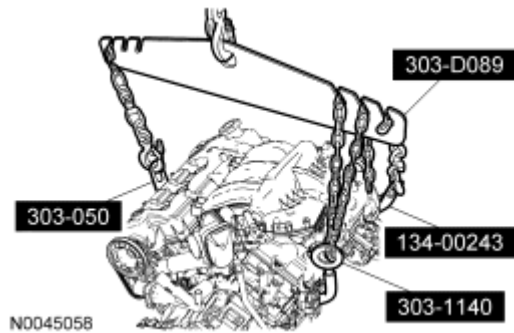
Identifying Special Tools (134-00243, 303-050, 303-1140, 303-D089)
